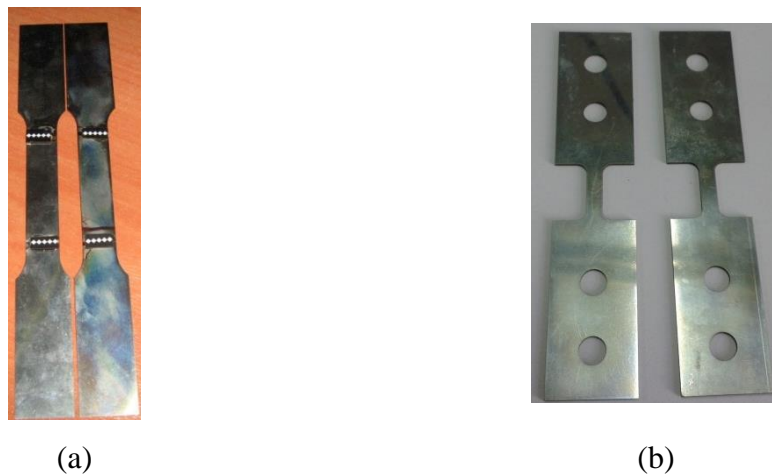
(a) Quasi-static tension specimen, (b) Hopkinson tension specimen.
